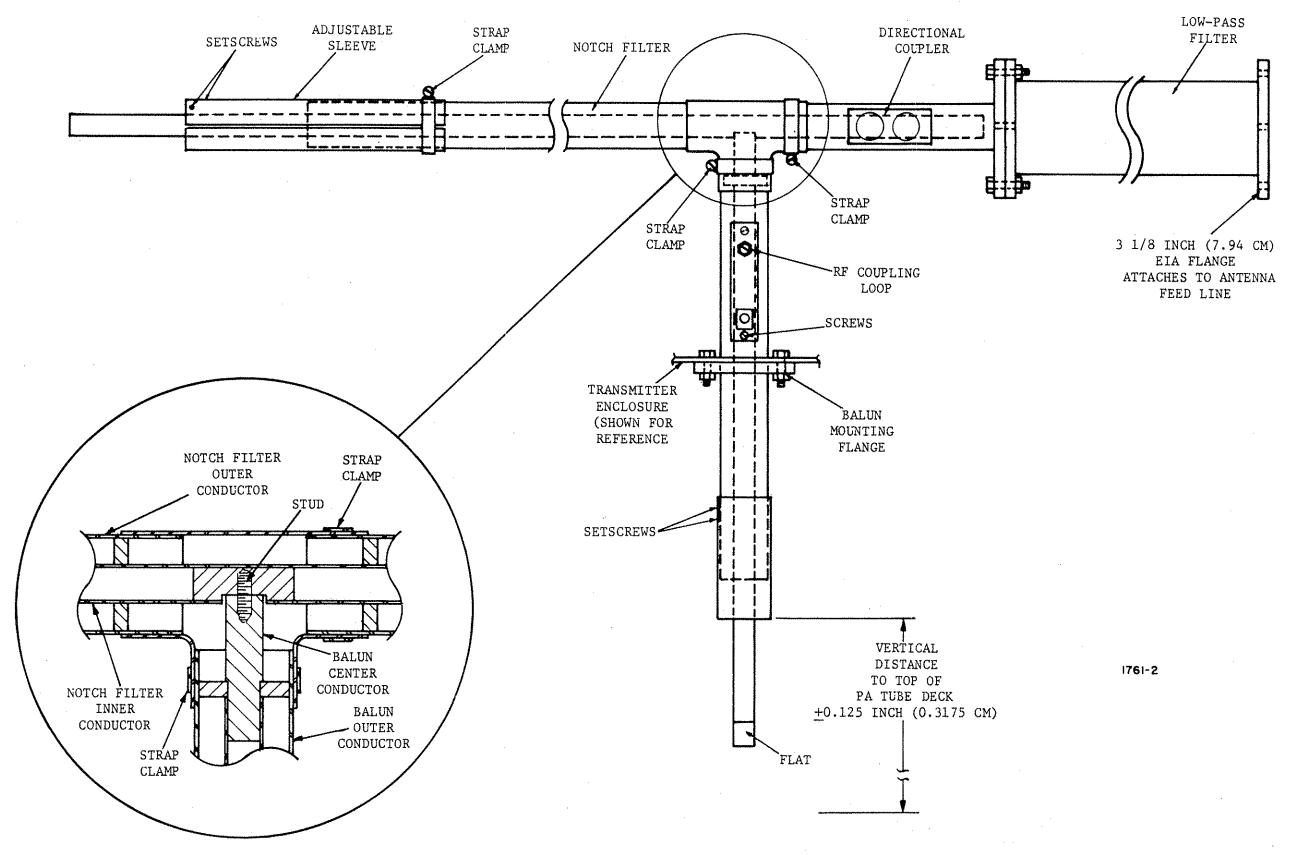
NOTCH FILTER AND RF BALUN ASSEMBLY DETAILS
